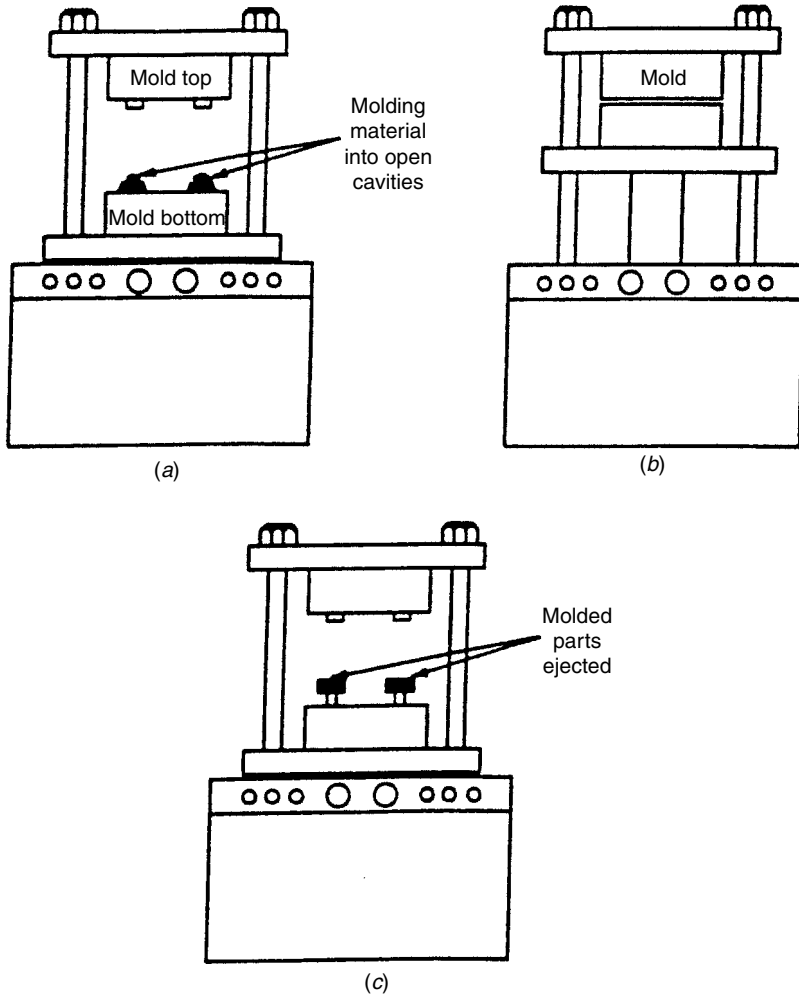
Compression molding sequence: (a) molding material is placed into open cavities; (b) the press closes the mold, compressing material in the hot mold for cure; (c) the press opens and molded parts are ejected from the cavities.
